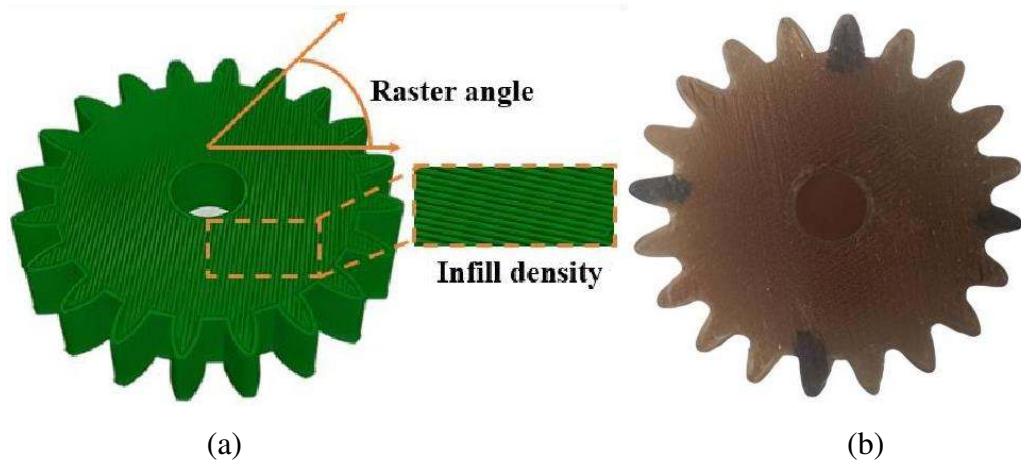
(a) 3D model gear, (b) 3D printed gear
